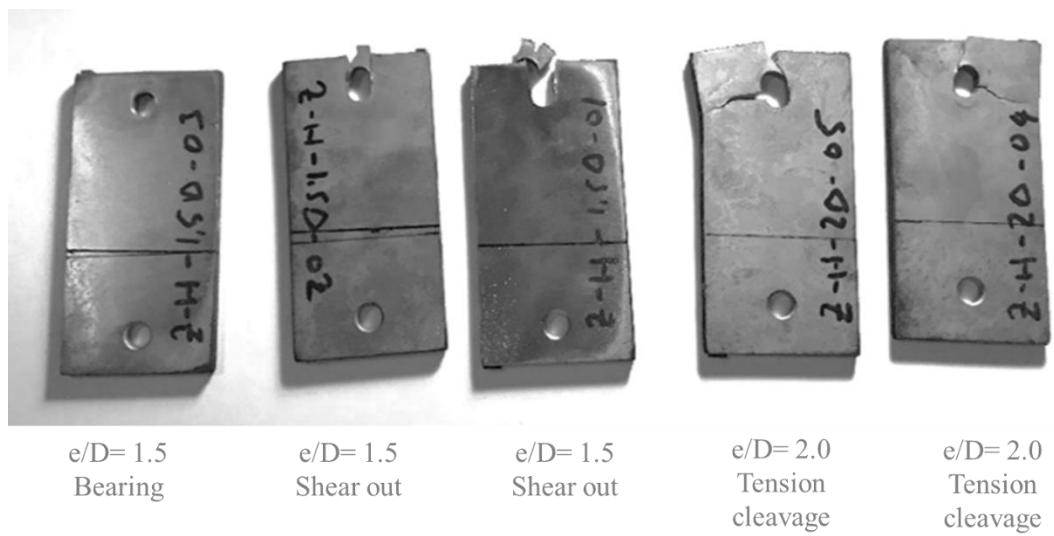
HIP post-treated L build direction pin-bearing test specimens after fracture.
